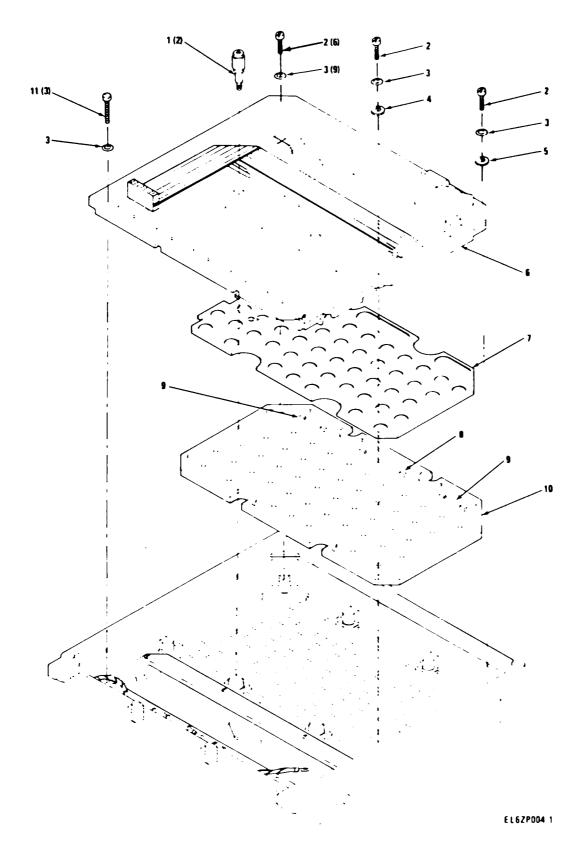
Keyer-Message Device KY-879/P, Top Cover Assembly (Sheet 1 of 2).
